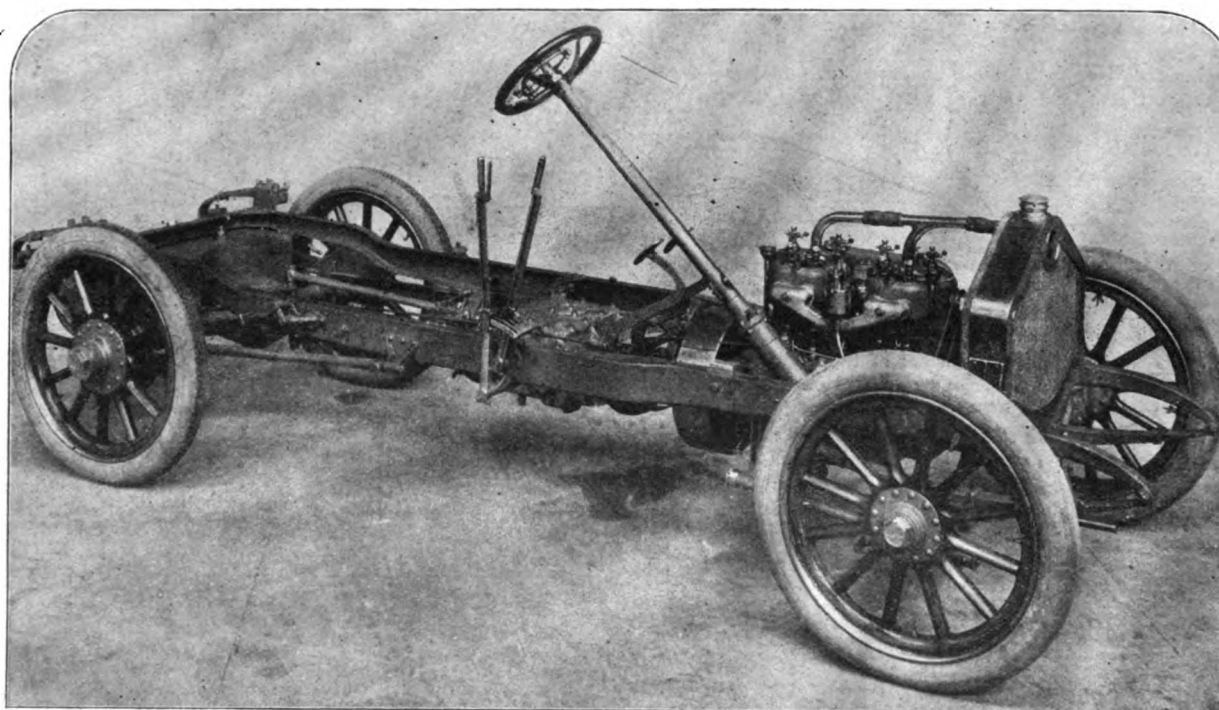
Chassis of the new Crossley 20-25-h.p. Car.
